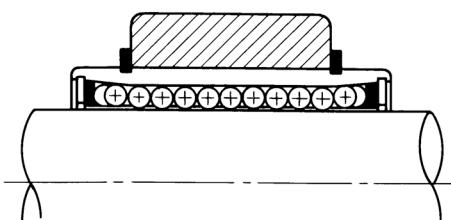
The method features stop rings fixed into bearing grooves for installation.
